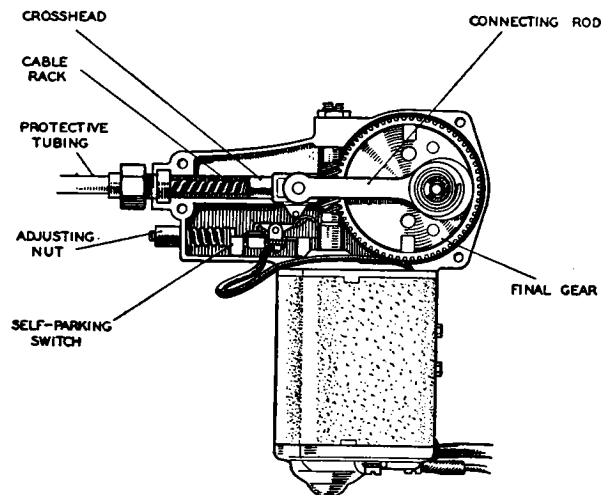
Showing the DR3 wiper motor with cover plate removed.
